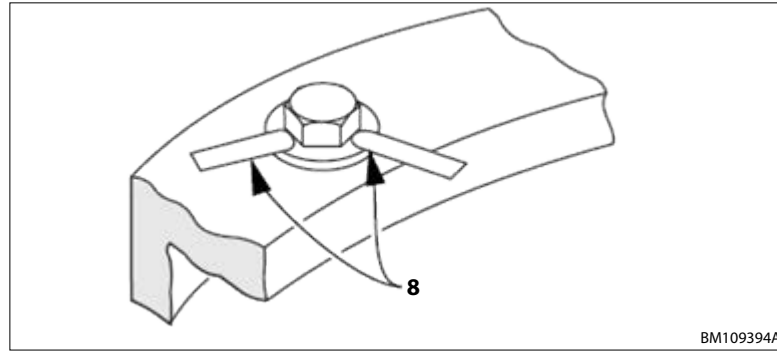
Turntable Side Bearing Bolt Feeler Gauge Check
